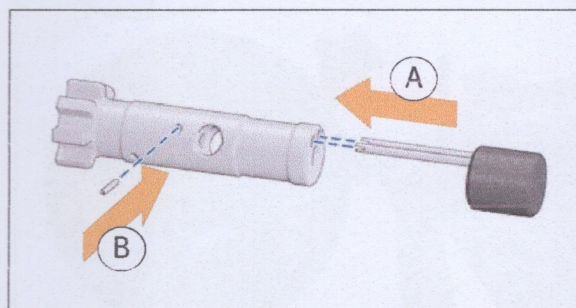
Pushing assembly tool for extractor into the bolt head
